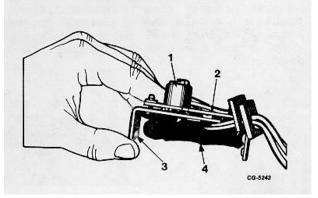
Electronic Control Unit (Circuit Board, Sensor and Plate Assembly)
